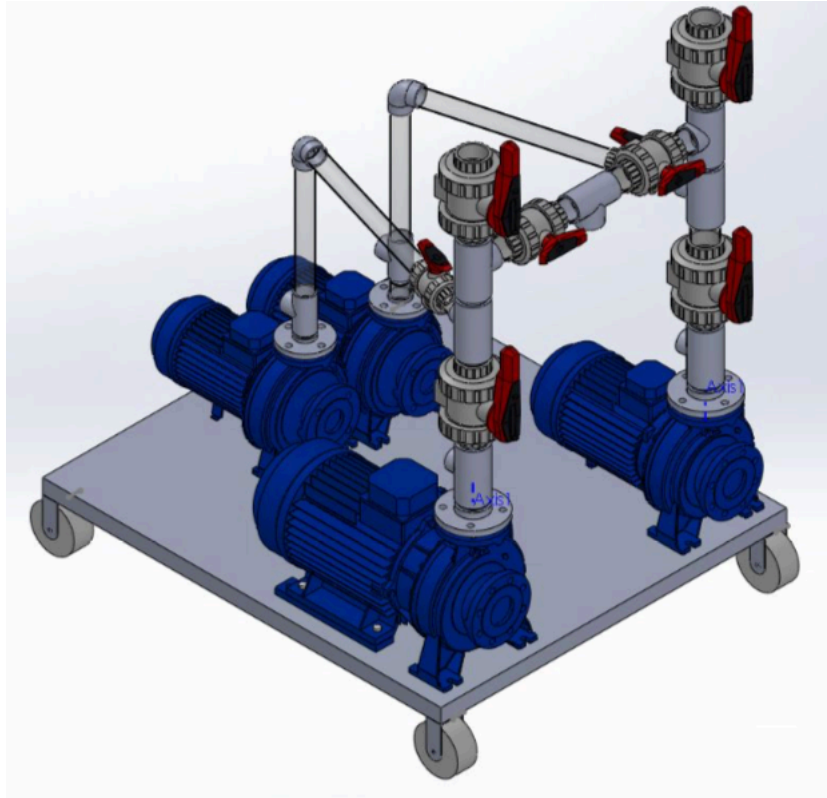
Manifold for pumps (Drawing by Espen Hestdahl)
